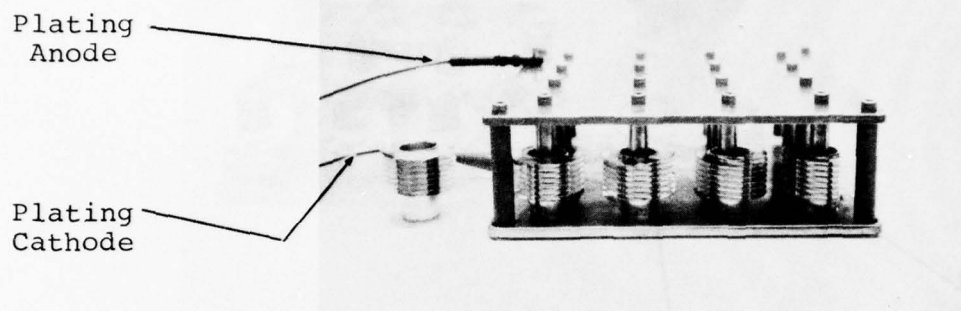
Internal electro-plating fixture: This fixture is used to plate the inside surface of the molybdenum disc with copper. Each heat-pipe is partially filled with the plating electrolyte. Sixteen pipes can be plated simultaneously.
